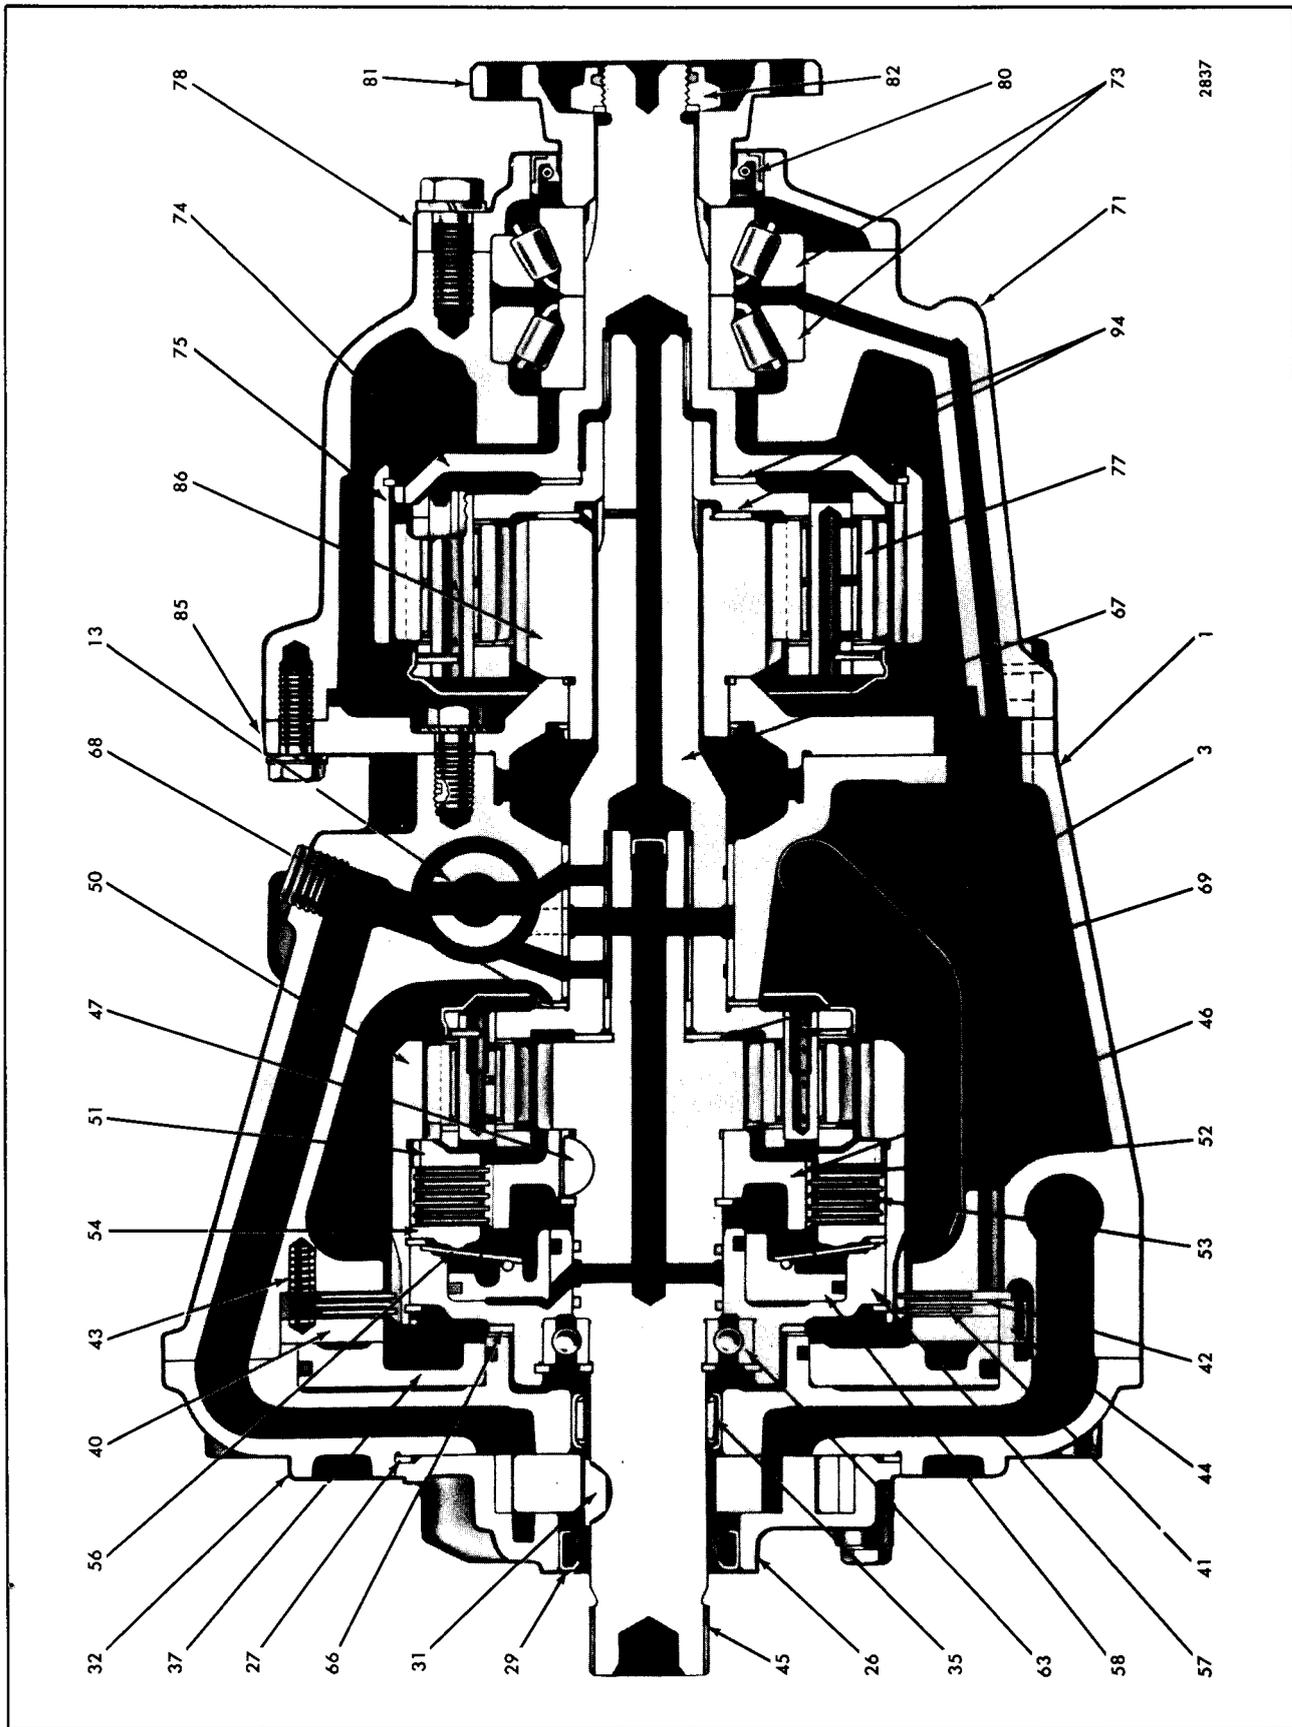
Warner Marine Gear Assembly (2.1:1 Ratio Model 71C Shown)
